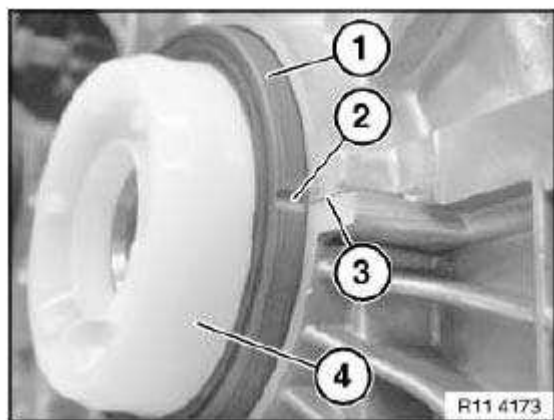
Support Bushing, Crankshaft Radial Seal With Groove And Housing Partition
